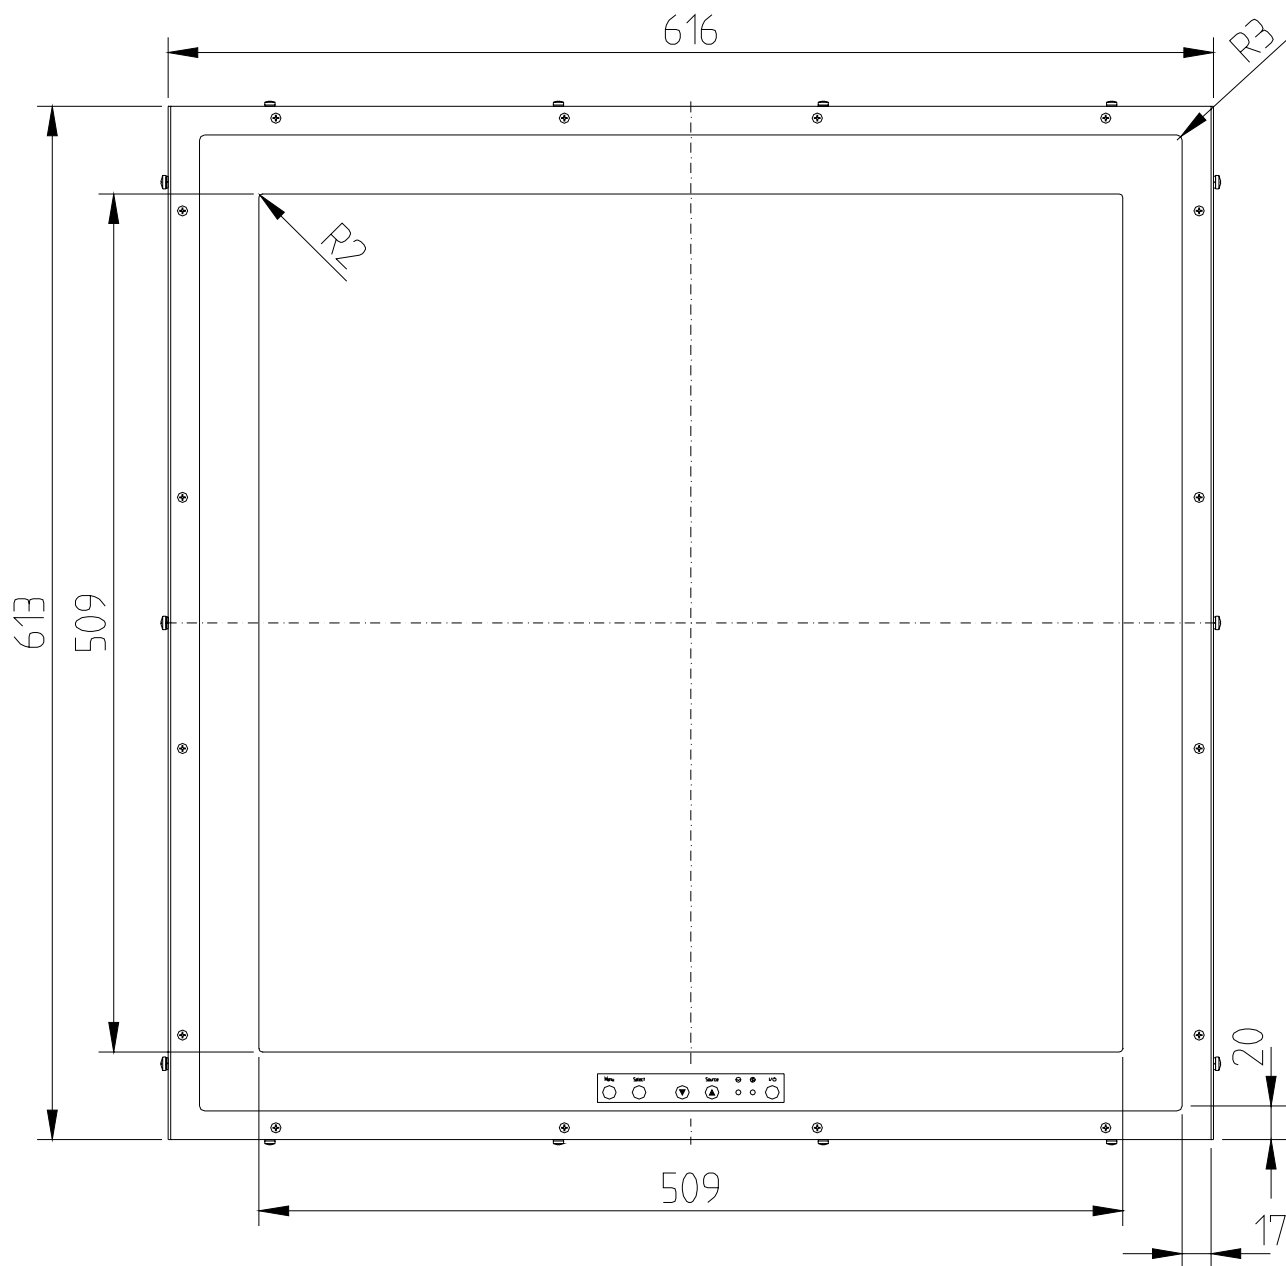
Raptor SQ2801 Dimensions (Chassis version); Front View
